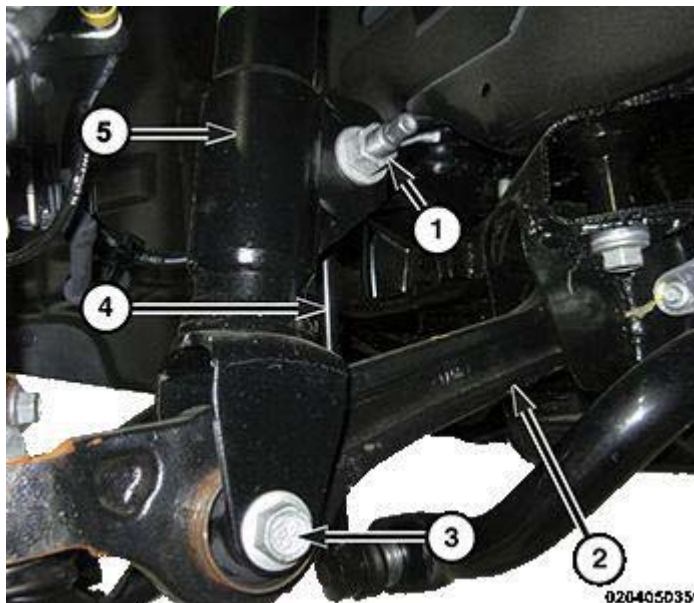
Stabilizer Link To Strut Nut, Lower Control Arm, Lower Control Arm Bolt, Stabilizer Link & Shock/Strut Assembly
